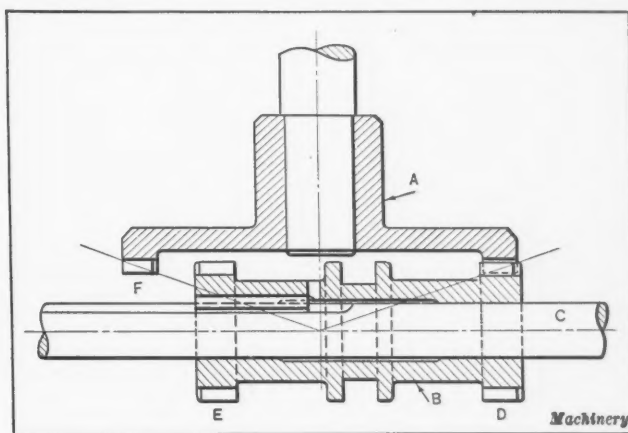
Reversible Face Gear Drive with Sliding Double Pinion
